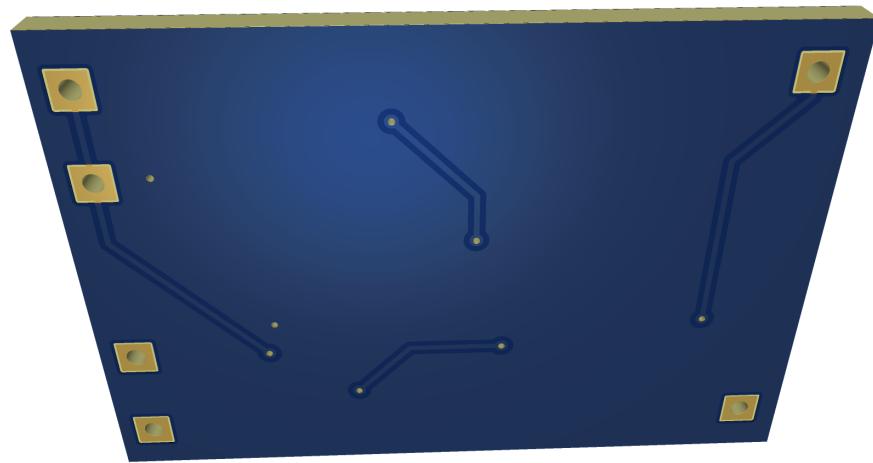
Back Layer (3D) View of the Custom Designed PCB
